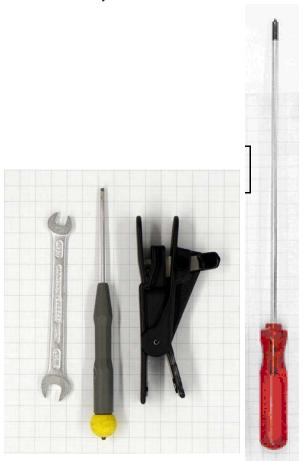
Photograph of listed tools. From left-to-right (Allen key not shown).
